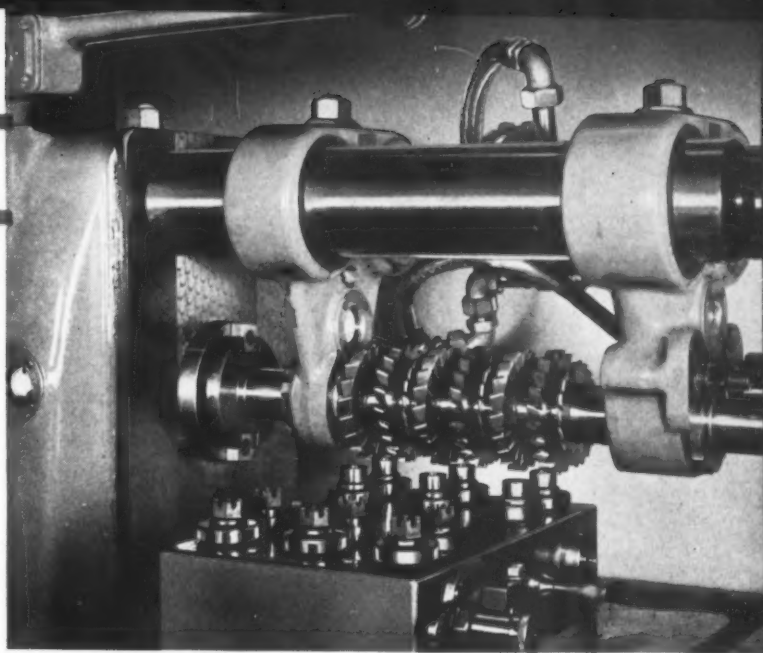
(Above) Milling Hexagonal Sides of Nuts and Cutting Castellated Slots. Fig. 5. (Below) Grinding Cylinder Sleeves after Assembling
